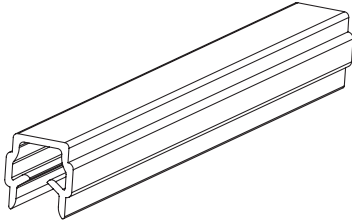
Groove cover for linear axes HM/HT/HC
